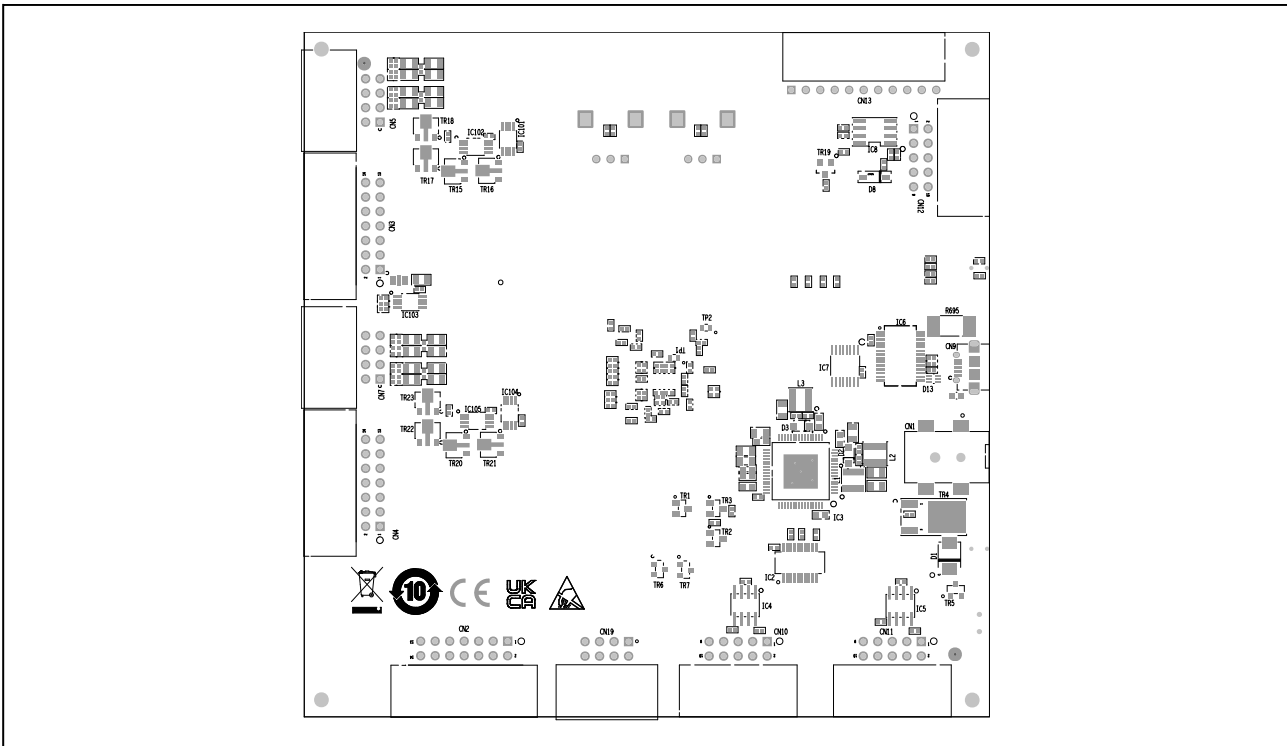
Starter kit board bottom view, board revision D017988\_06\_V01
